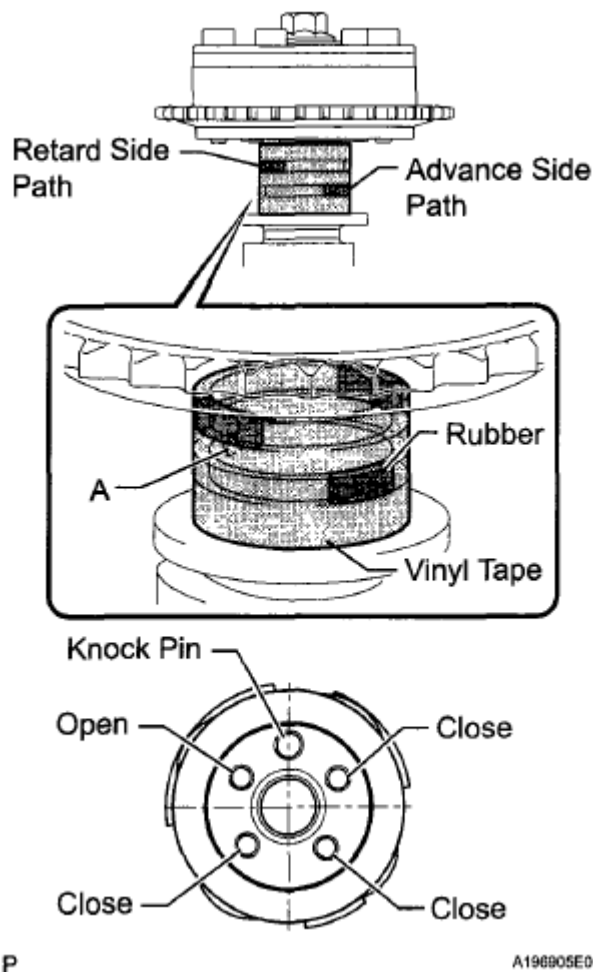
Covering Oil Paths Of Cam Journal With Vinyl Tape
